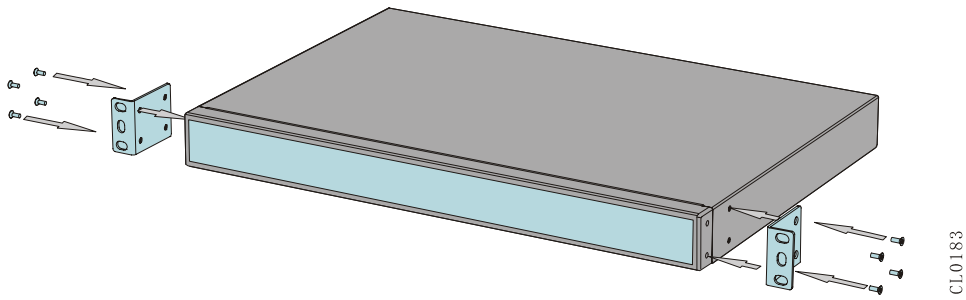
INSTALL HANGING EARS TO THE SWITCH
